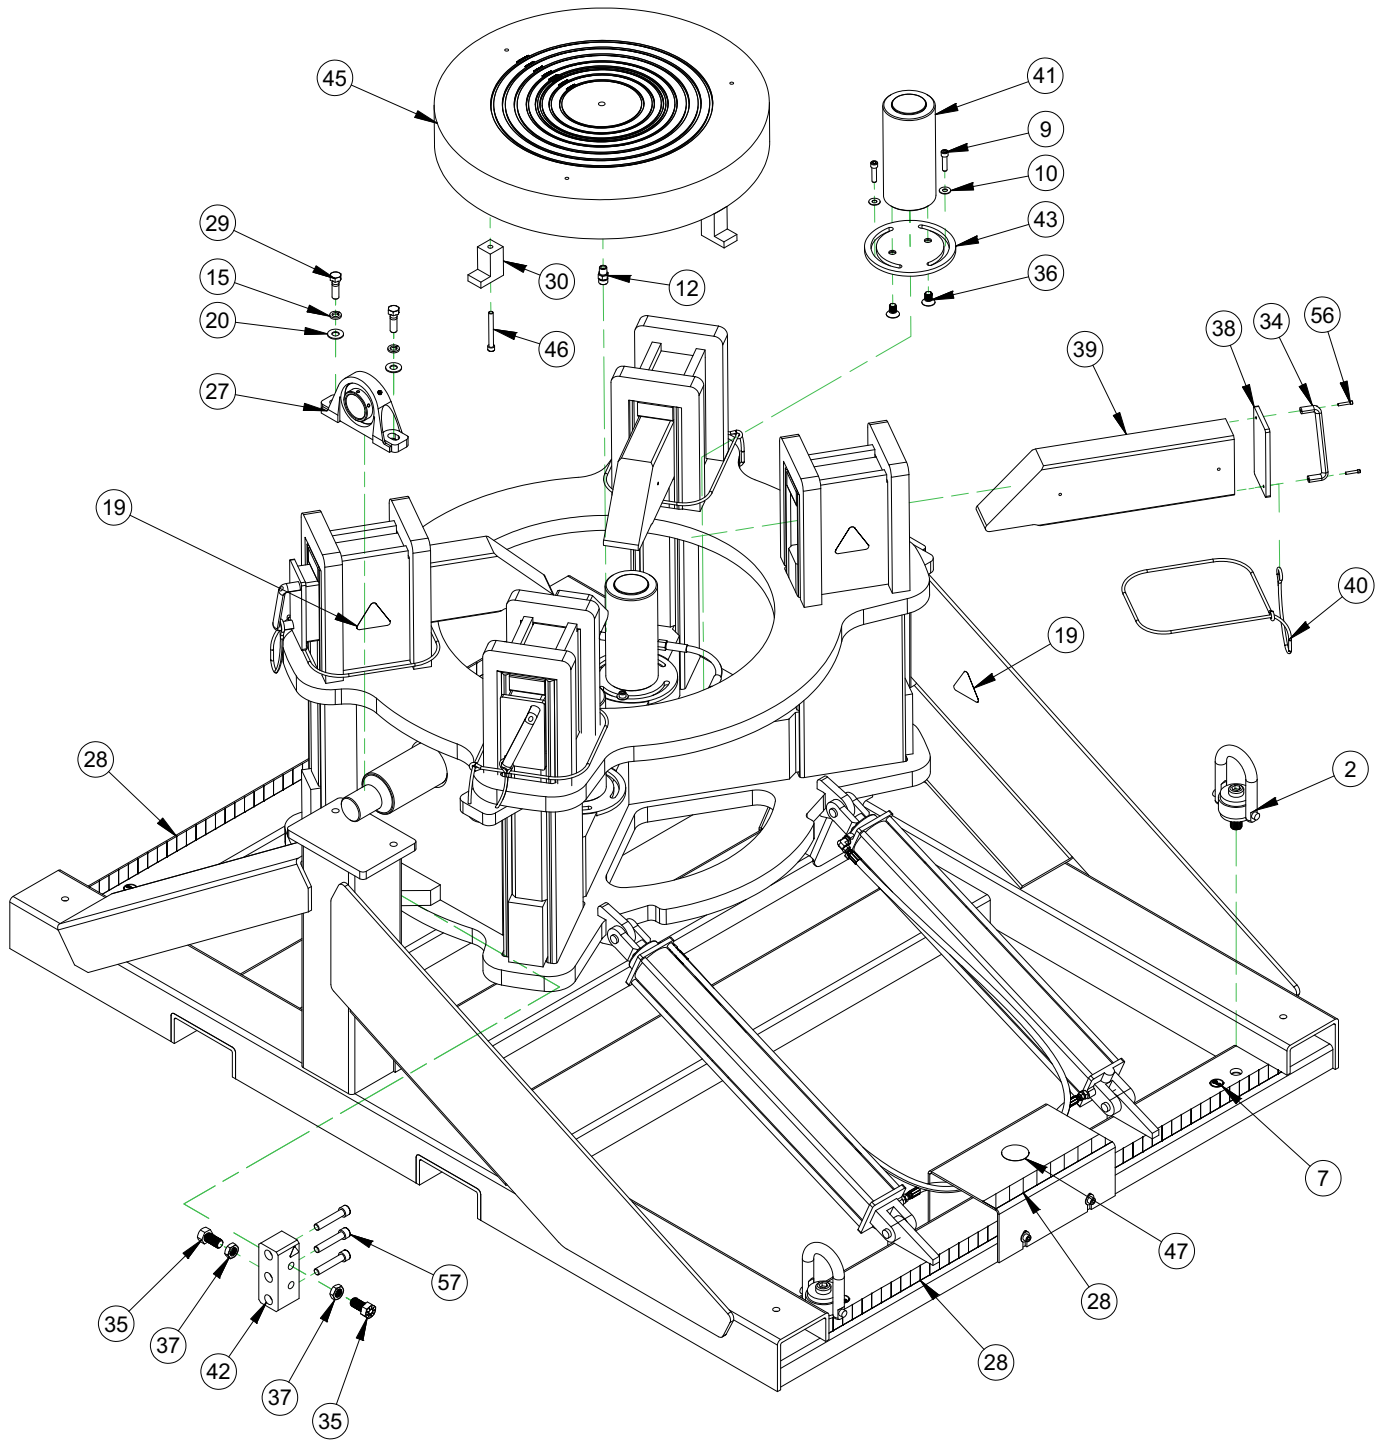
UFV-24-300T ASSEMBLY 2 (P/N 91681)
